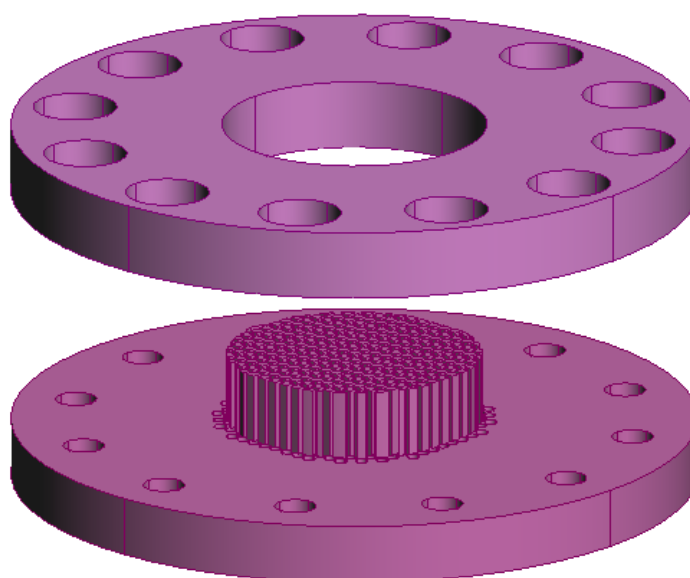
Die dimensionsFigure 3.3 - Exploded view of extrusion die
